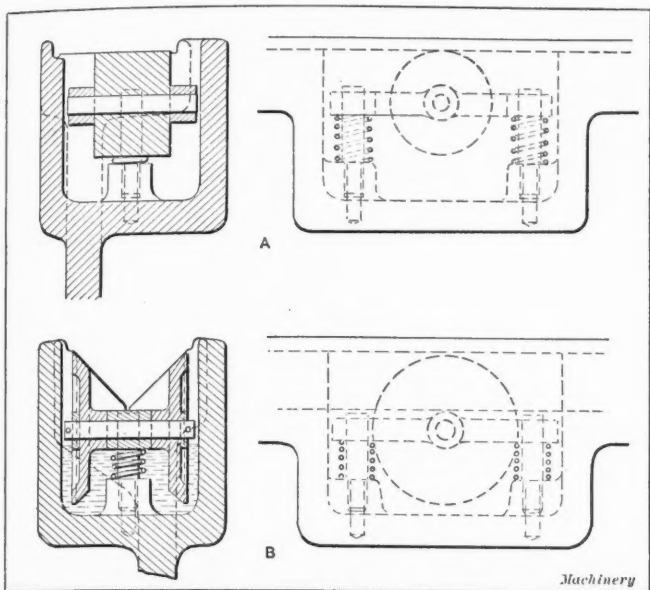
Lubricating Rollers and Well for Birch Grinding Machine
